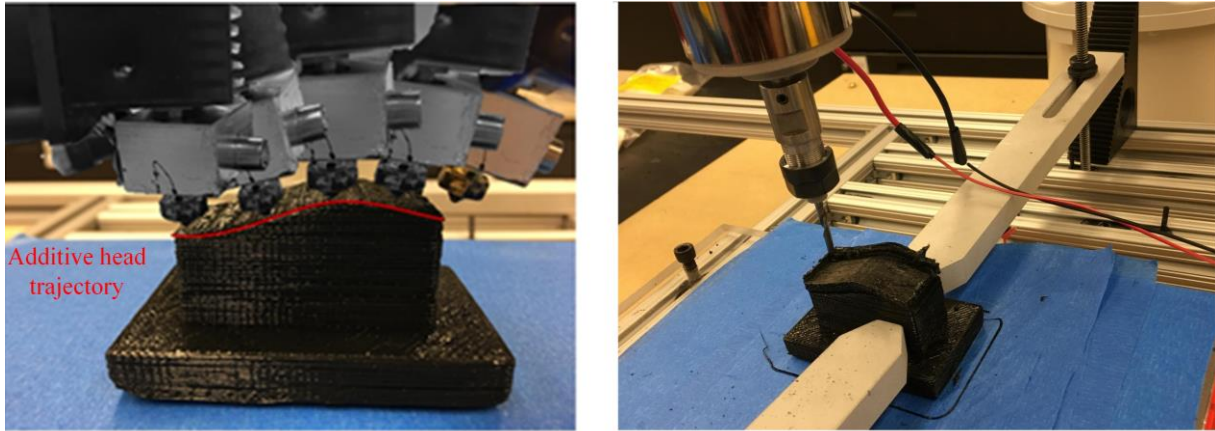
Freeform surface printing and milling: (left) freeform printing, and (right) freeform milling
